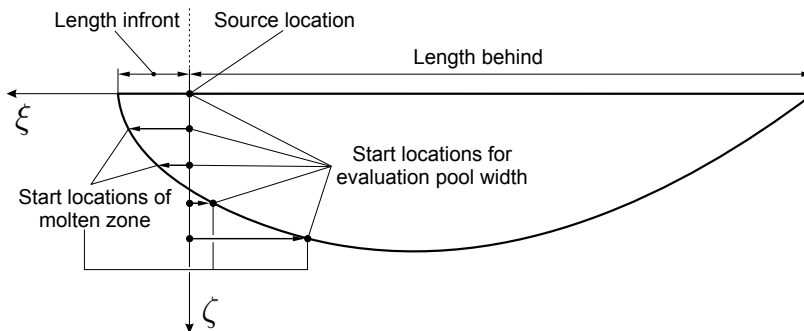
Determination of location of molten zone in the front region of weld pool
